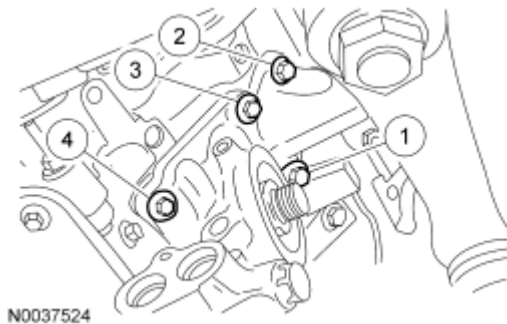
Oil Filter Adapter Bolts Torque Sequence
